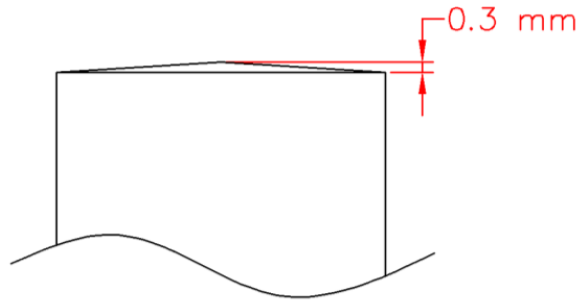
Wear test 2 OPT pin conical contact geometry
